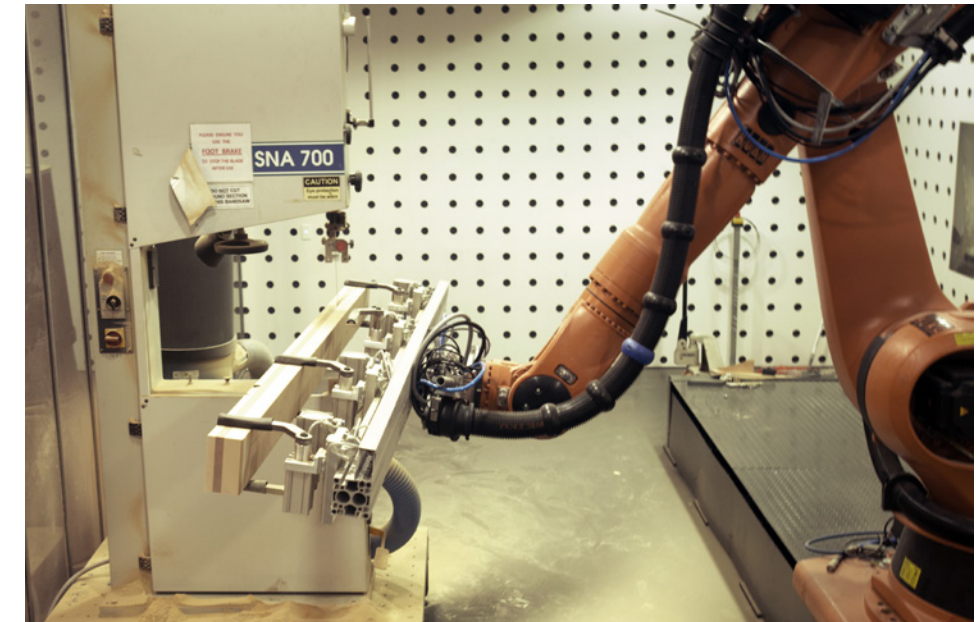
The final fabrication process with robot guiding a timber part through the bandsaw.
